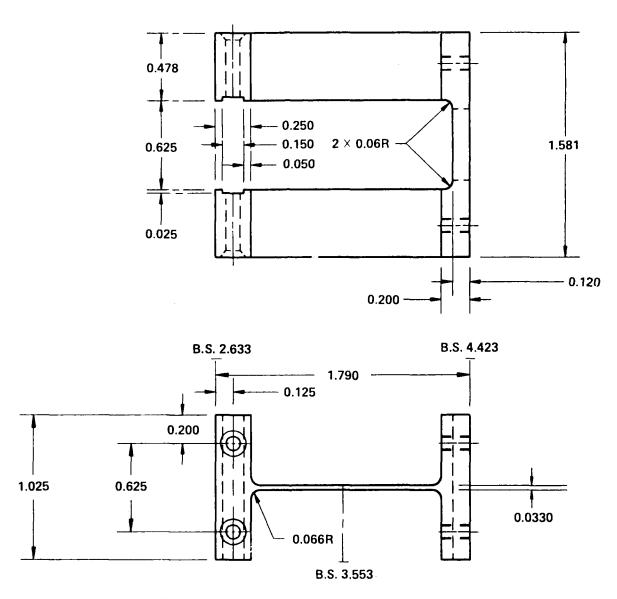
Flap flexure; 17-4PH H900 steel; dimensions in inches.
